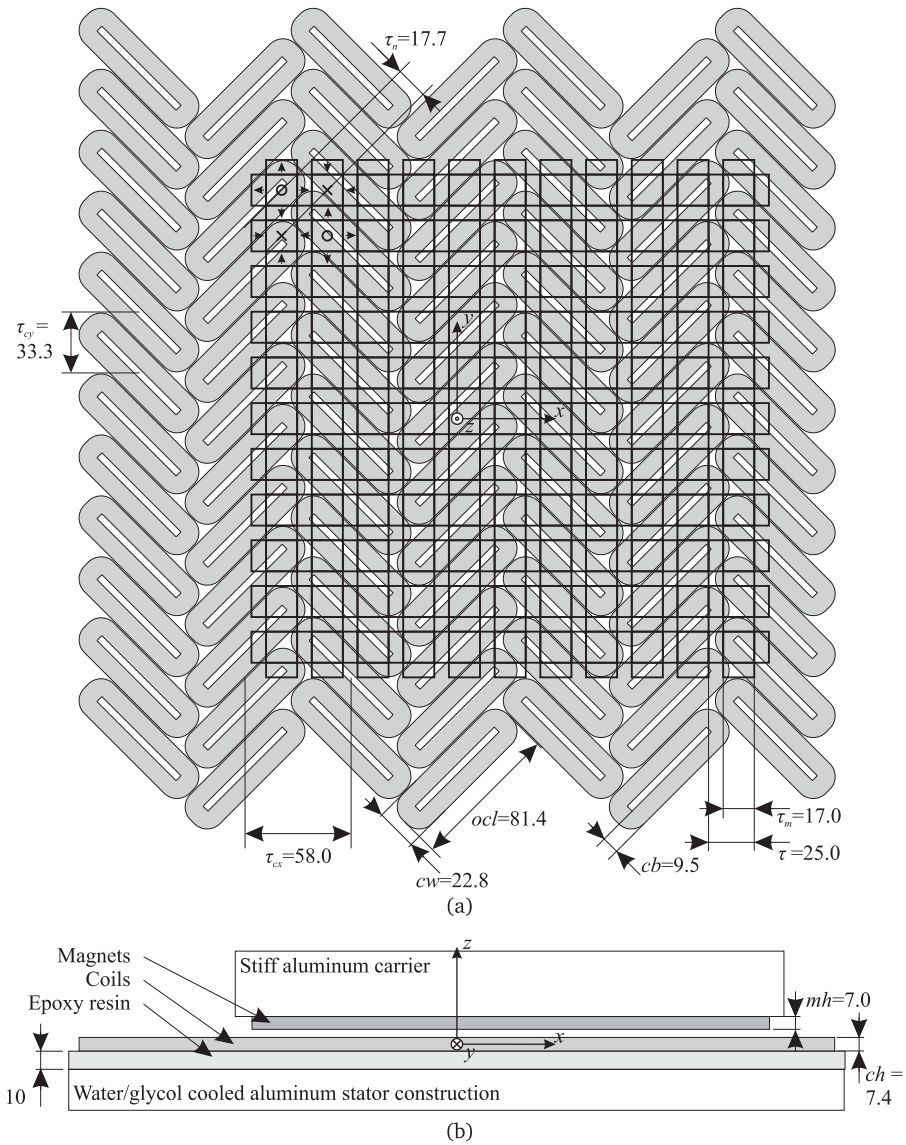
Herringbone pattern planar actuator: a) Top view, b) side view (sizes in mm).
